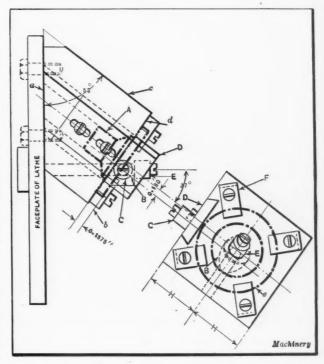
Fixture used in testing and machining Gage shown in Fig. 1
